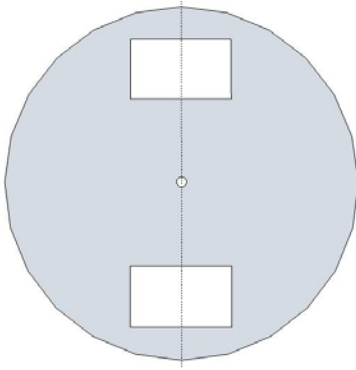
The schematic drawing of the borated aluminum plate [34].
